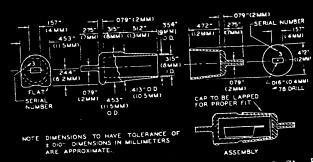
Weighing Bottle, Pig-Type, Metal, Size B
